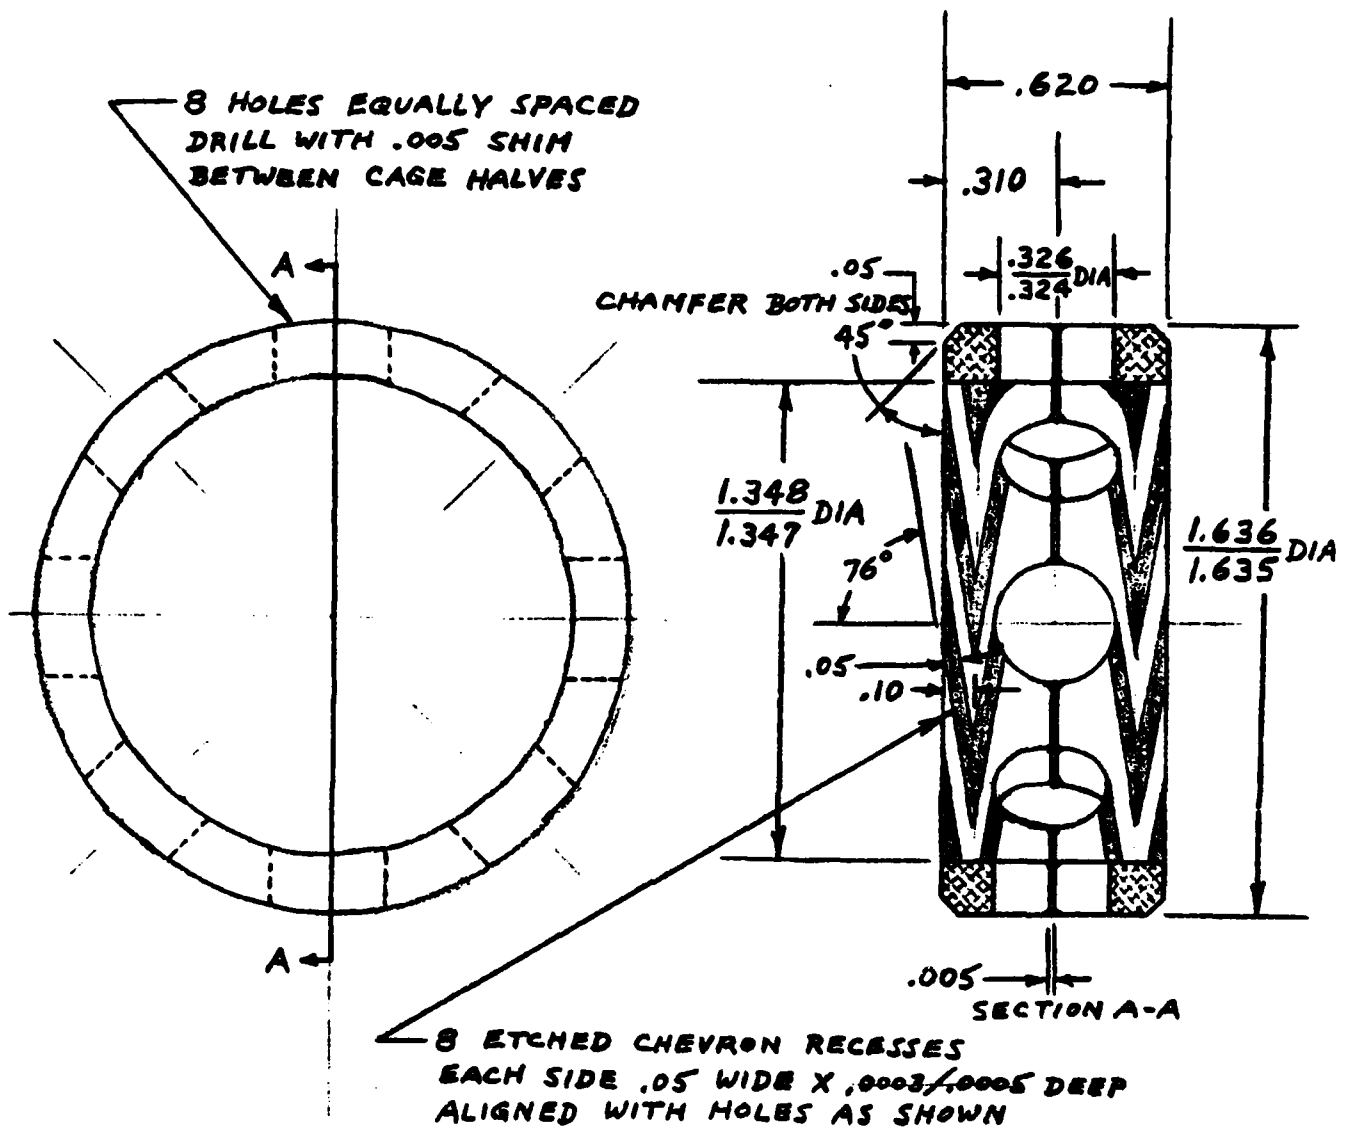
Solid Lubricated Air Bearing Guided Cage Design for Oil-Less Turbine Ball Bearings
